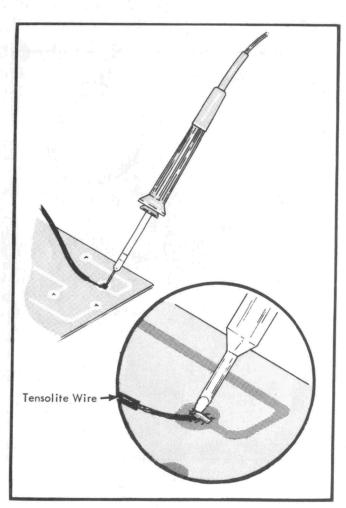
REMOVING SOLDER FROM A CONNECTION
